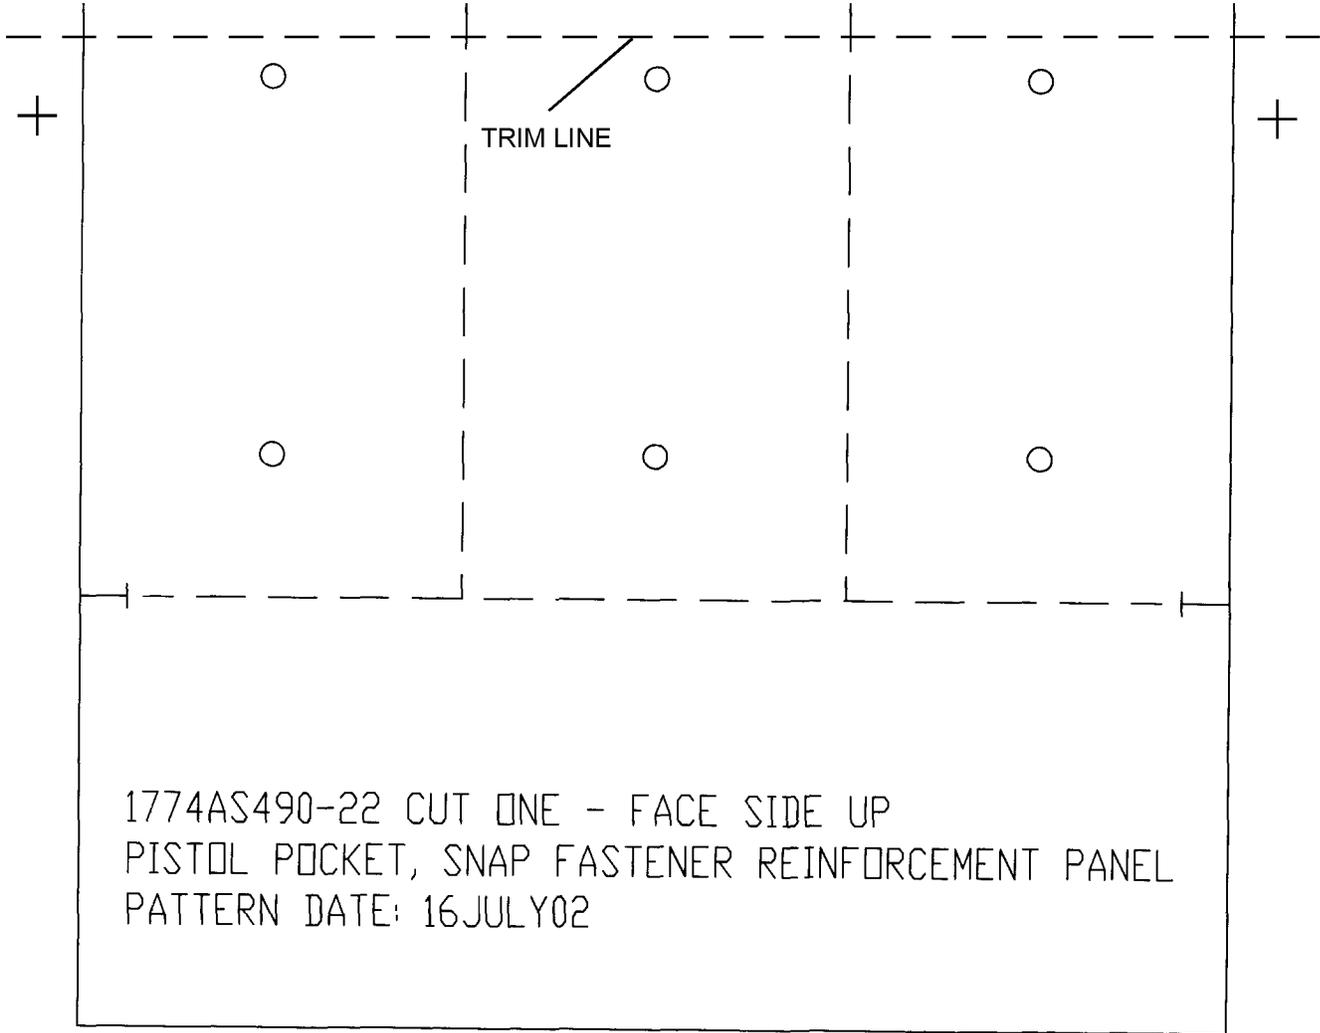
Pistol Pocket Snap Fastener Reinforcement Panel Pattern (Sheet 2 of 2)
